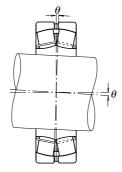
Permissible Misalignment of Spherical Roller Bearings
